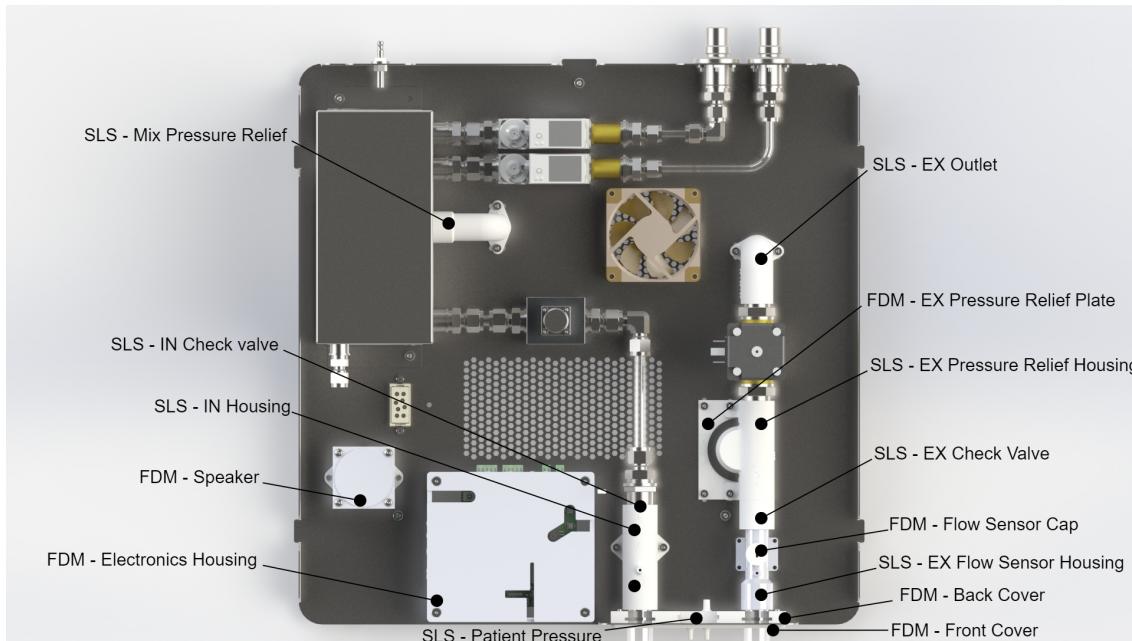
Overview of all 3D printed parts (shown in white).IN and EX stand for inspiratory and expiratory flow respectively.
